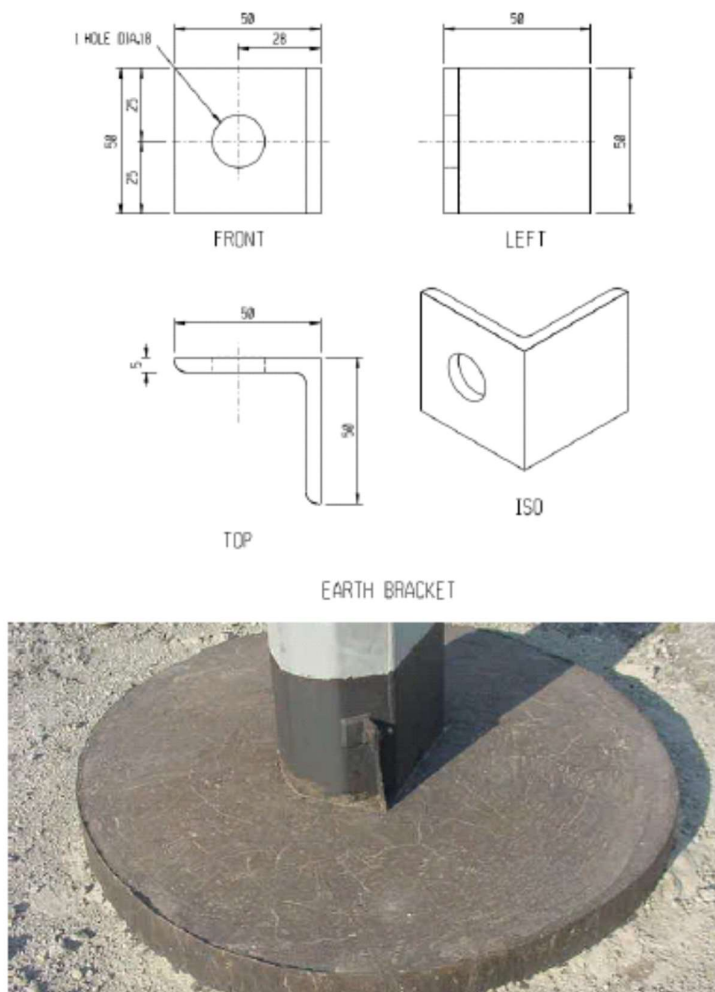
Earth-Lug for Additional Earthing on Tubular Steel Structures
